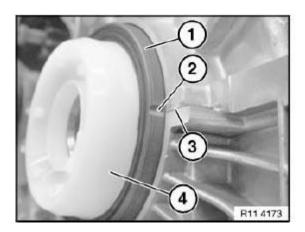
Identifying Support Sleeve & Housing Partition Courtesy of BMW OF NORTH AMERICA, INC.
